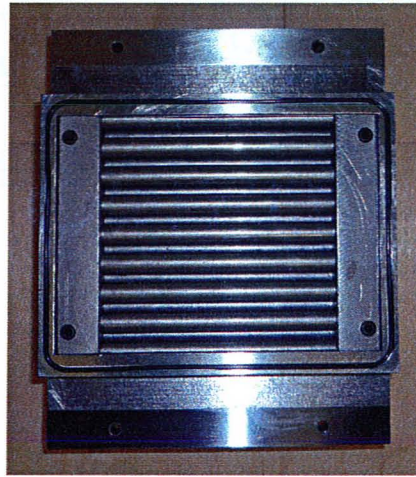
Photograph of Test Section Tube Bundle Assembly Including O-Ring
